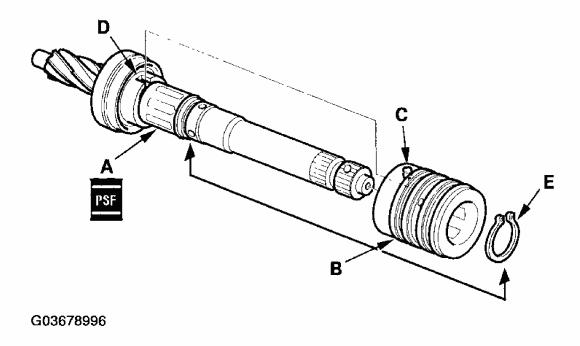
Installing Pinion Shaft Components Courtesy of AMERICAN HONDA MOTOR CO., INC.
